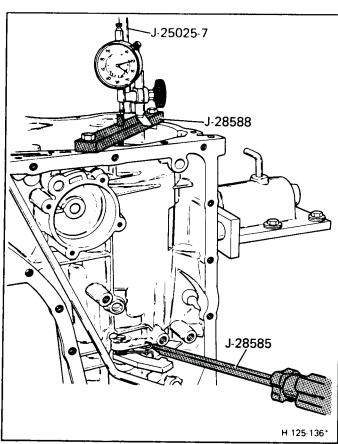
Lo Roller Clutch Race Selective Thrust Spacer
